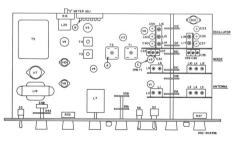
Bottom View Receiver Tube Locations And Alignment Points
